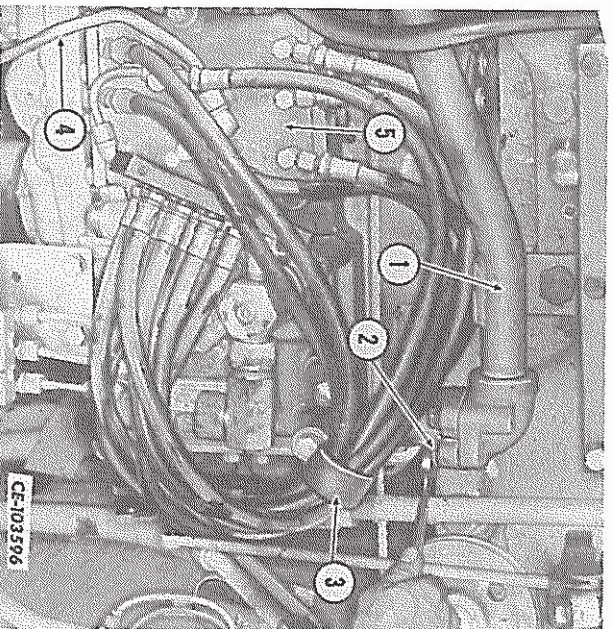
Disconnecting the Equipment Pump Outlet Hose
